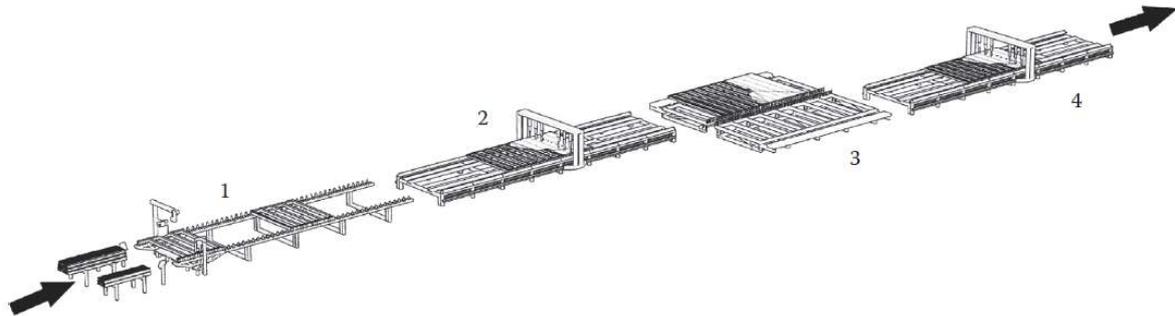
Semi-automated line for wall and ceiling panels (Lawson et al., 2010).
